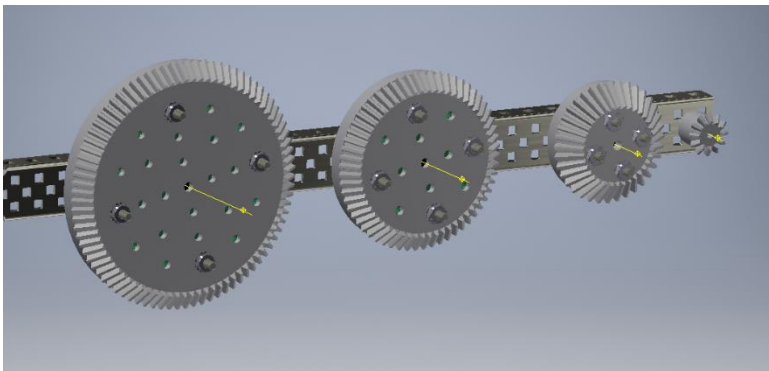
Render of all Bevel Gear adapters with 12-tooth gear, 36-tooth gear, 60-tooth gear, and 84-tooth gear.
